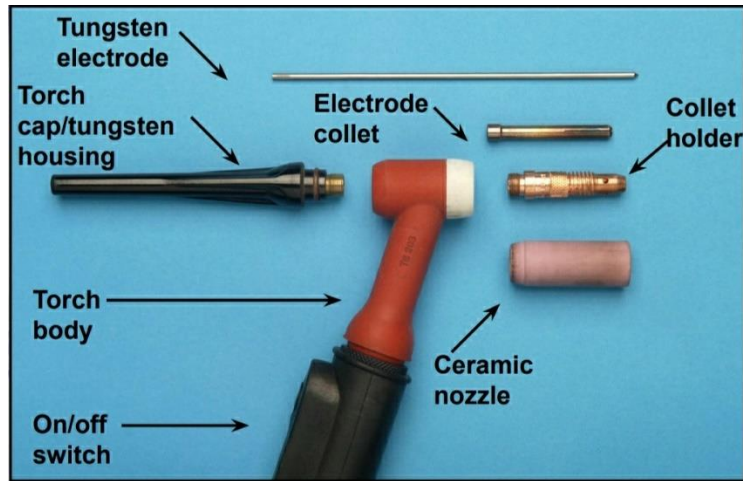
GTAW torch with torch body, electrode, ceramic nozzle, collet holder, electrode collet and torch cap
